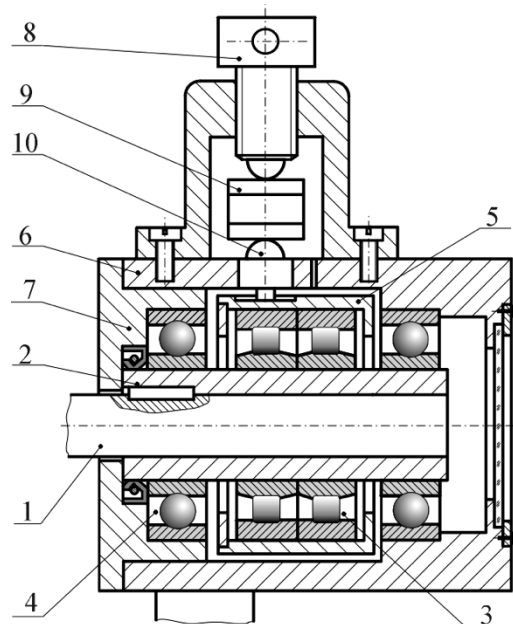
Test scheme for rolling bearings: 1 - shaft; 2 - inner sleeve; 3 - tested bearings; 4 - thrust bearings; 5 - outer sleeve; 6 - case; 7 - case cover; 8 - screw; 9 - loading spring; 10 - cylinder.
